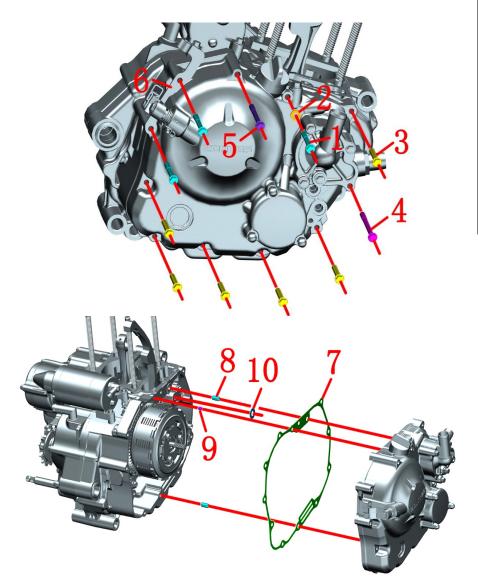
R	IGHT	Remove Right Crankcase Cover Assembly 1	CHK	40)
